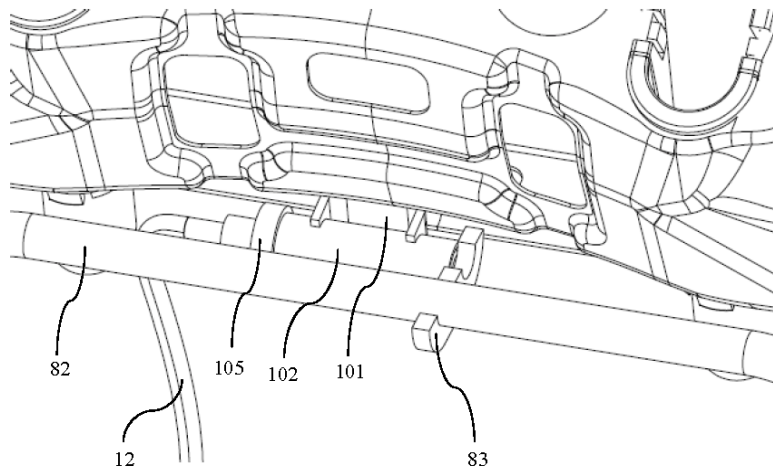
View of the trigger lock after the released upper assembly is rotated forward by the headrest springs
